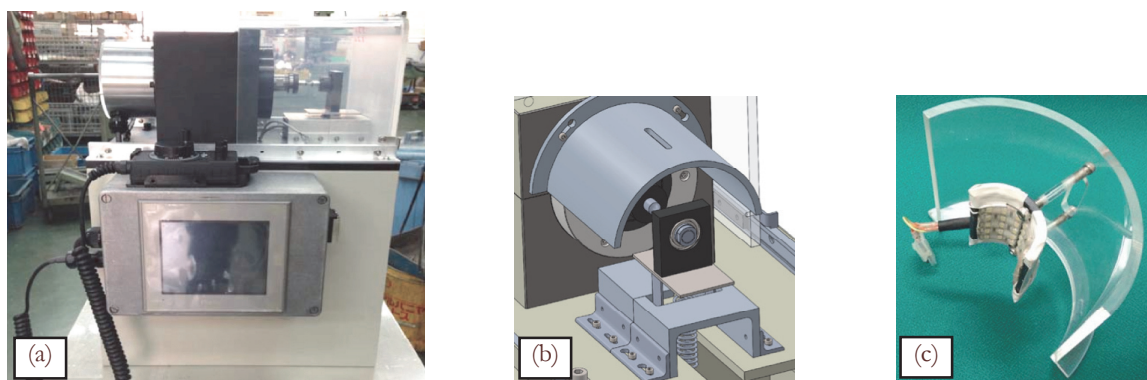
Newly developed high-speed rotating bending fatigue testing machine. (a): Side view photograph, (b): 3D-CAD image near specimen end, (c): LED type stroboscope and attachment cover.
